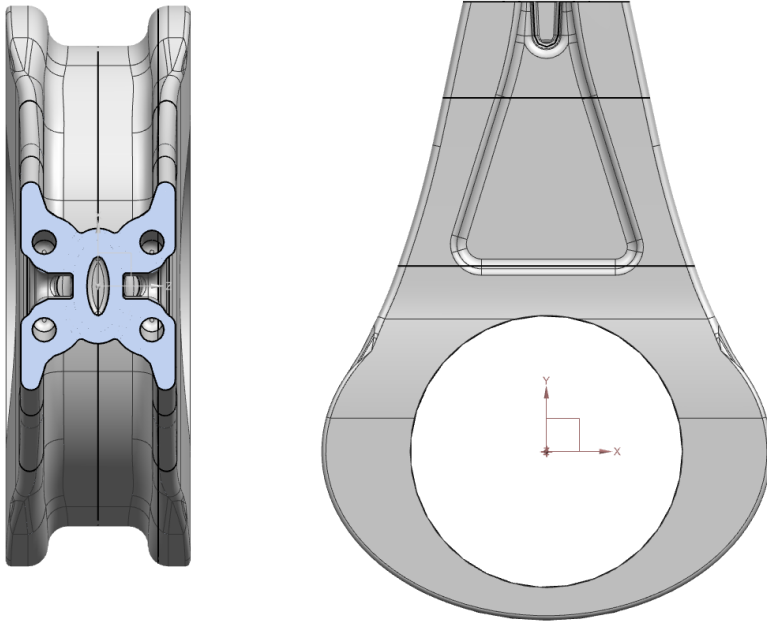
Cross-section of 2.0 beam; upper middle beam section.
